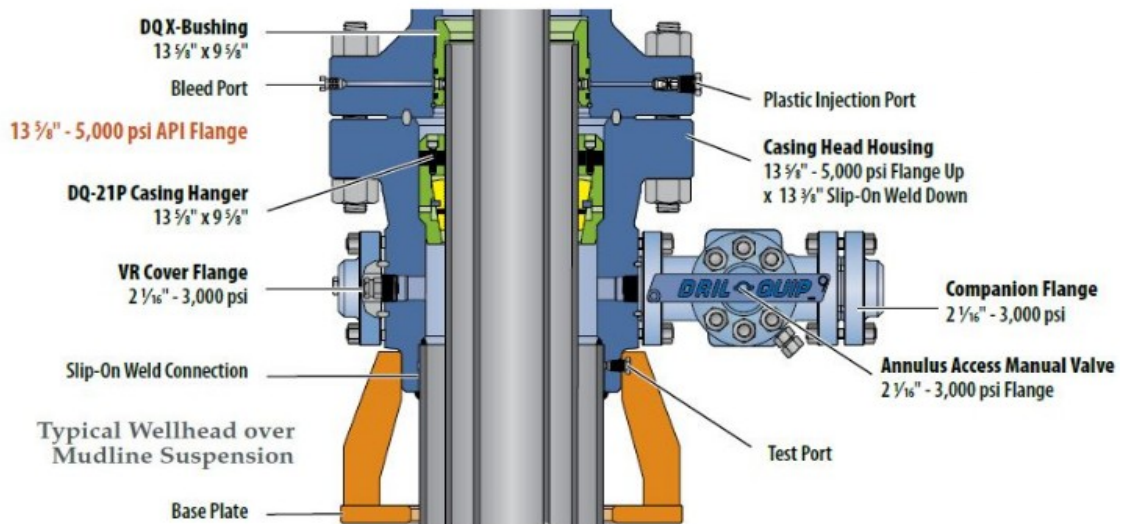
The casing head housing is a slip-on type, welded onto the surface casing and supported by a base plate. The connection of bottom to top flange, from the casing head housing onto the intermediate casing spool is established by 13 5/8 in API Flange rated with 5000 psi ([37], p 4).
